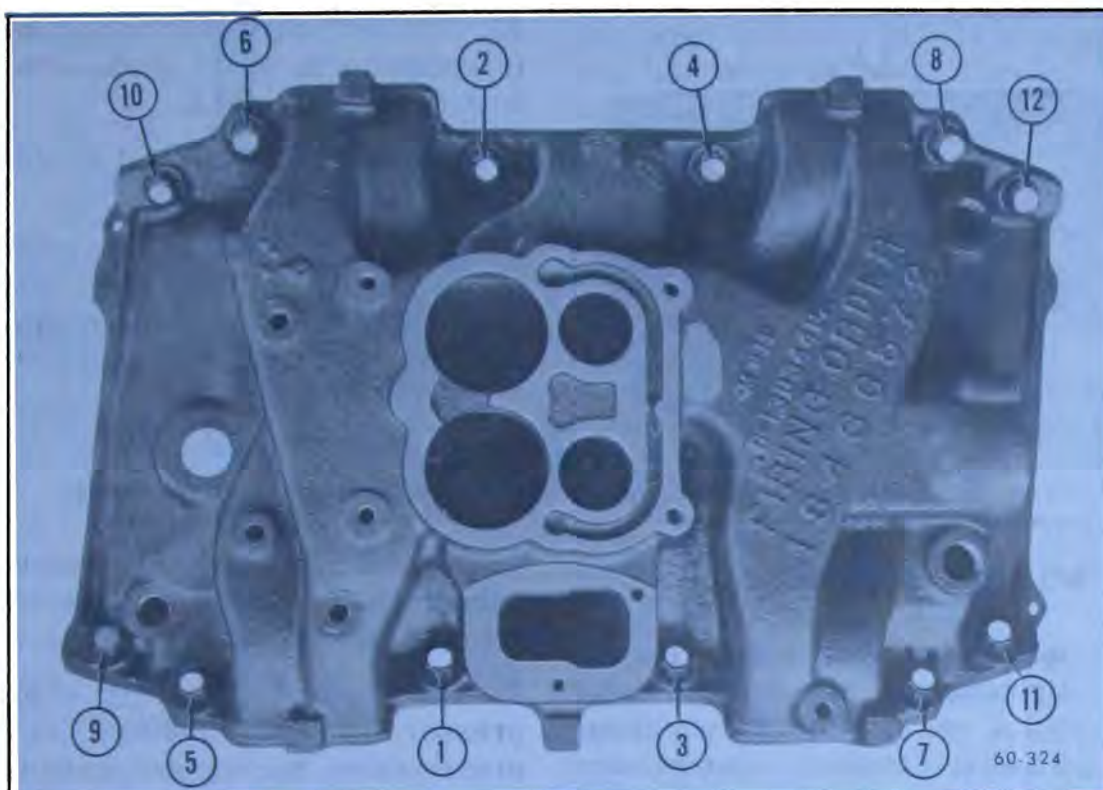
Intake Manifold Bolt Tightening Sequence
